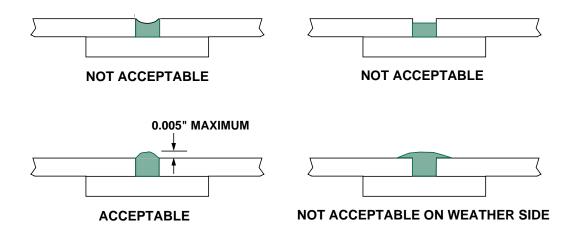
BUTT JOINT SEAL CONFIGURATIONS
